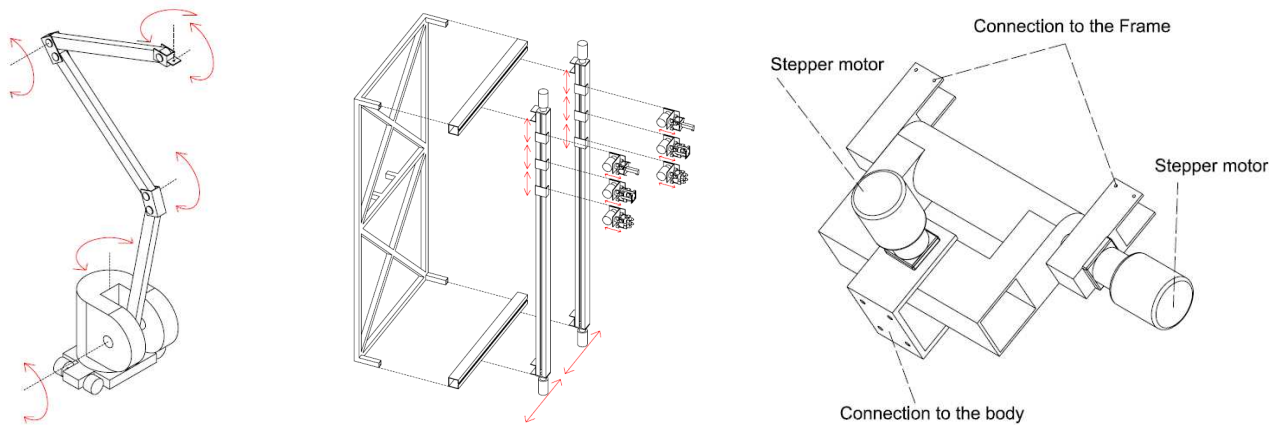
(left): Exploded view of the robot body, MEE. Figure 6 (middle): Exploded view of the MEE. Figure 7(right): fixture that connects the robot body with the MEE.
